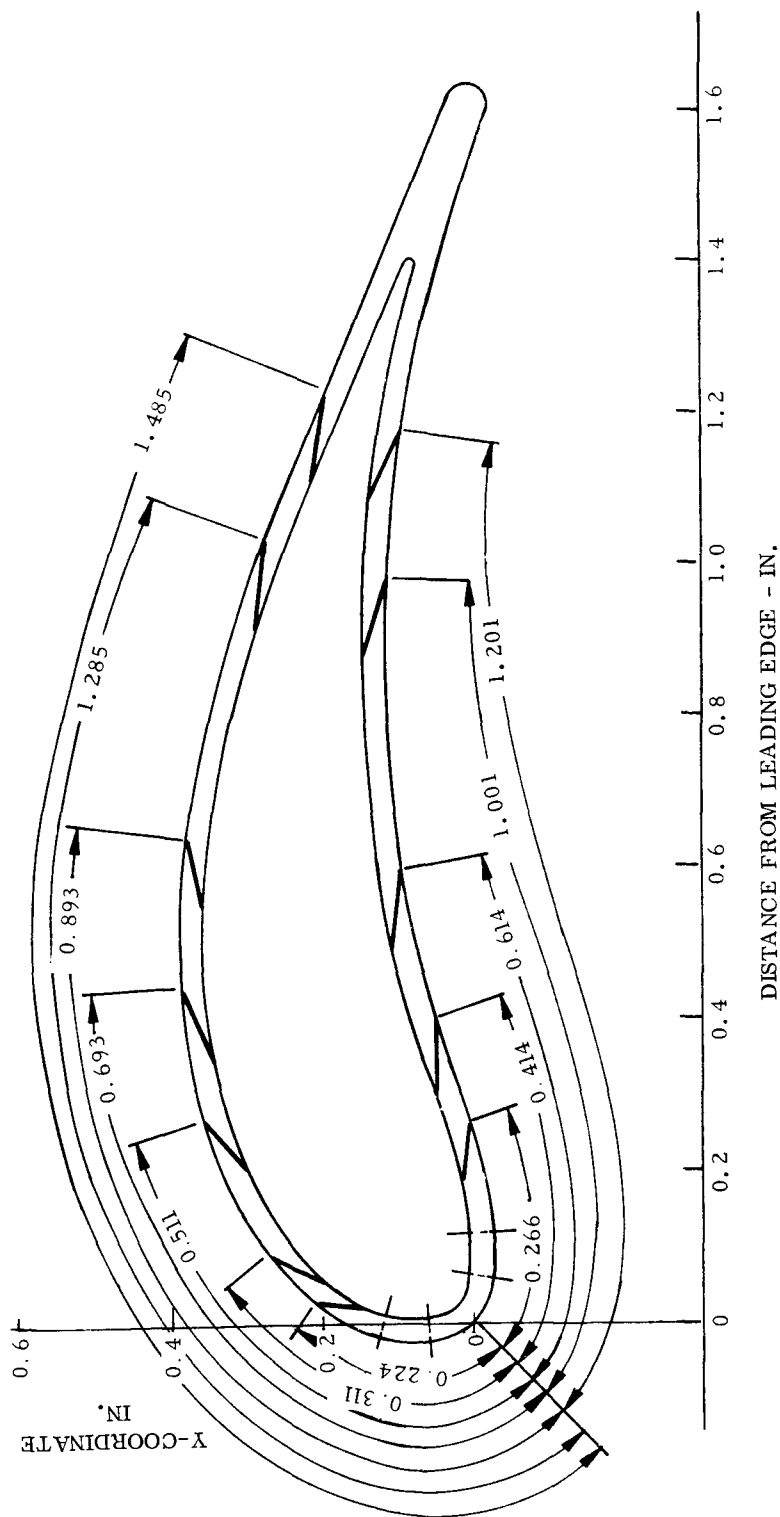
Fluid-Cooled Turbine Inlet Nozzle Blade Profile - Location of Film-Cooling Slots.
